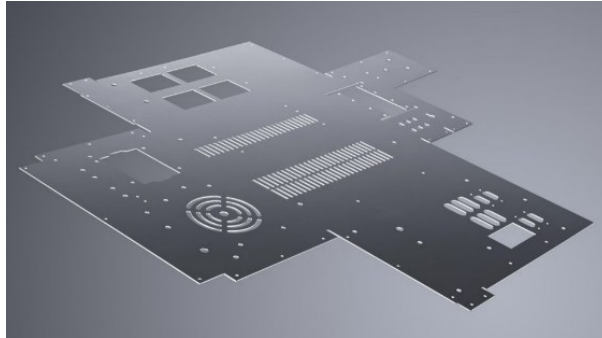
Laser cutted metal sheet (Laser cutting as a contact-free slitting process, 2022).
